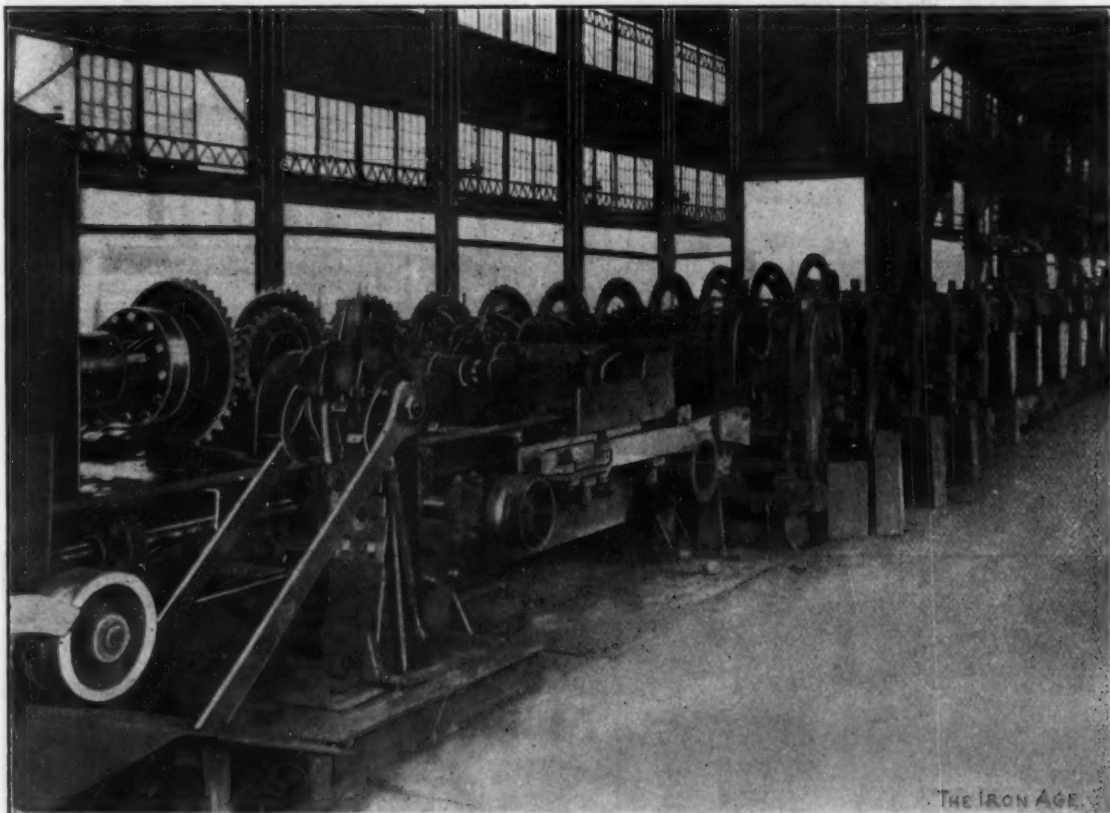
View of 14-Inch Continuous Mill and Flying Shear, Looking Toward Finishing End of Mill.
